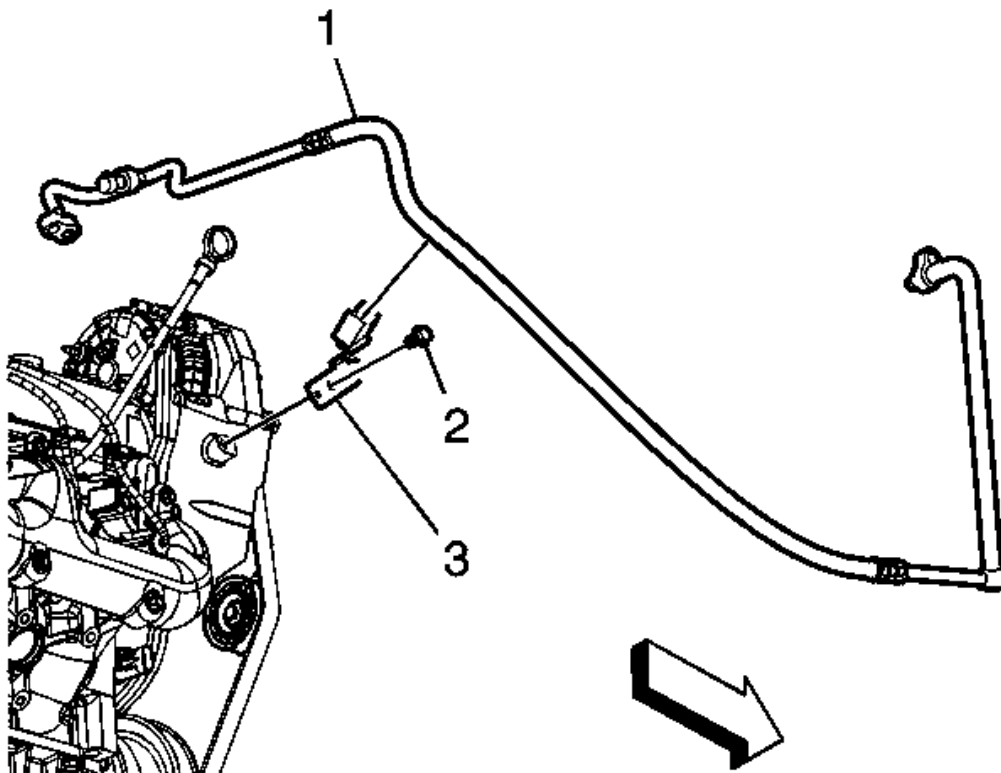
View Of A/C Compressor & Condenser Hose Bracket & Bolt
